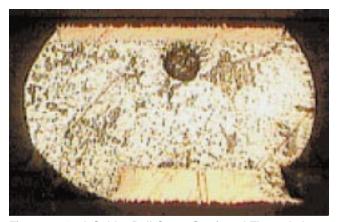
A Solder Ball Cross Sectioned Through A Void in the Solder Ball
